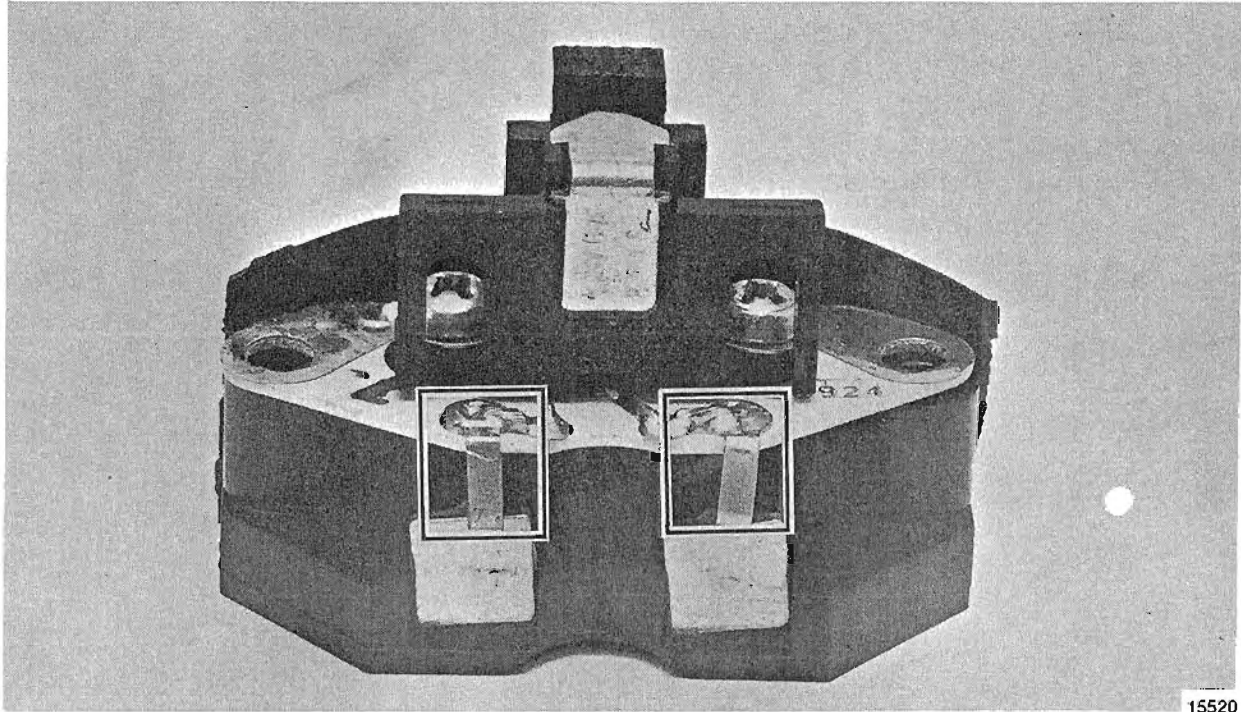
Location of Cracks in Metal Jumper Leads on Ignition Sensor
